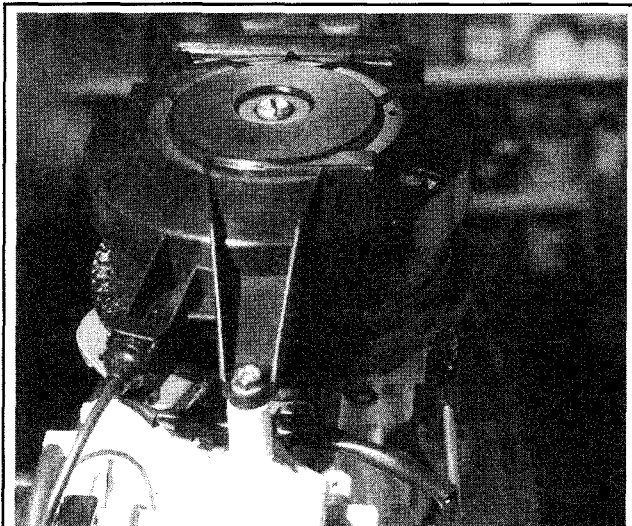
Typical hand rewind starter assembly mounted atop the flywheel
